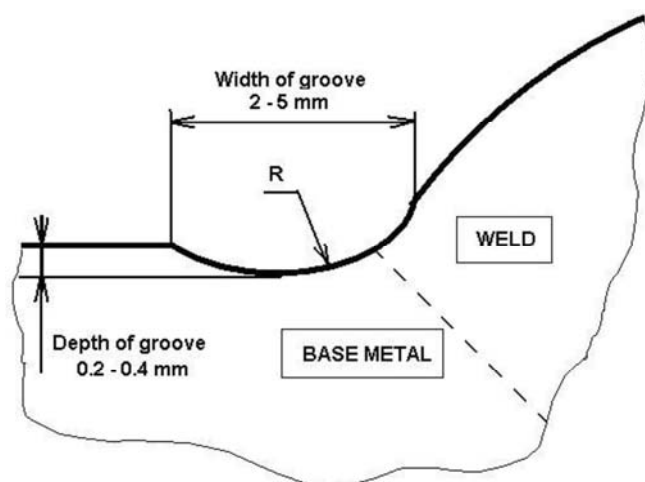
Profile of weld toe improved by Ultrasonic Peening [1]
